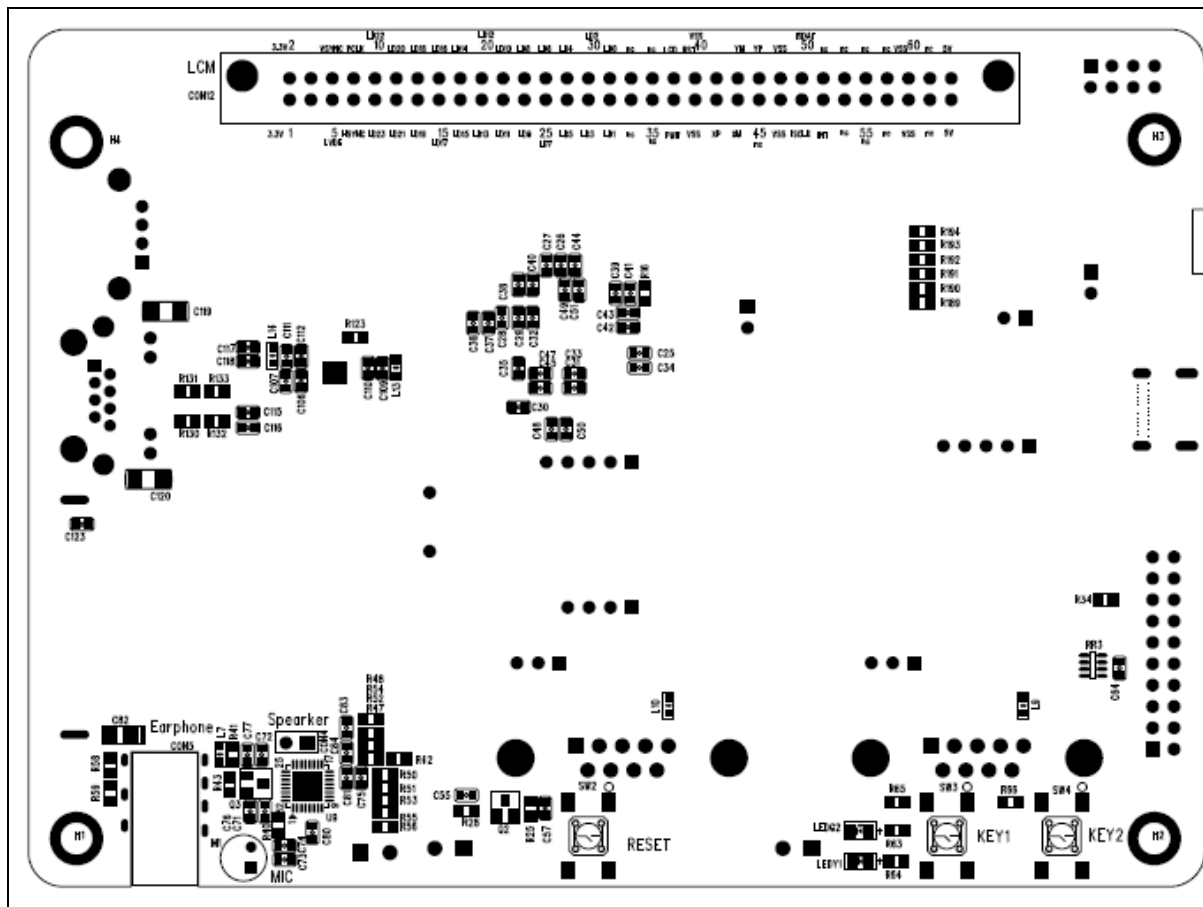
Front Placement of NuMaker-HMI-N9H31 Board
